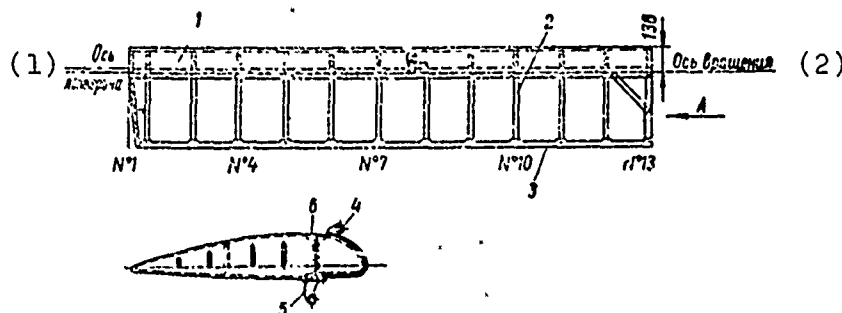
Framework of the upper wing flap: 1 - leading-edge covering; 2 - rib; 3 - rim; 4 - mounting bracket of control rod; 5 - bearing bracket; 6 - spar.
